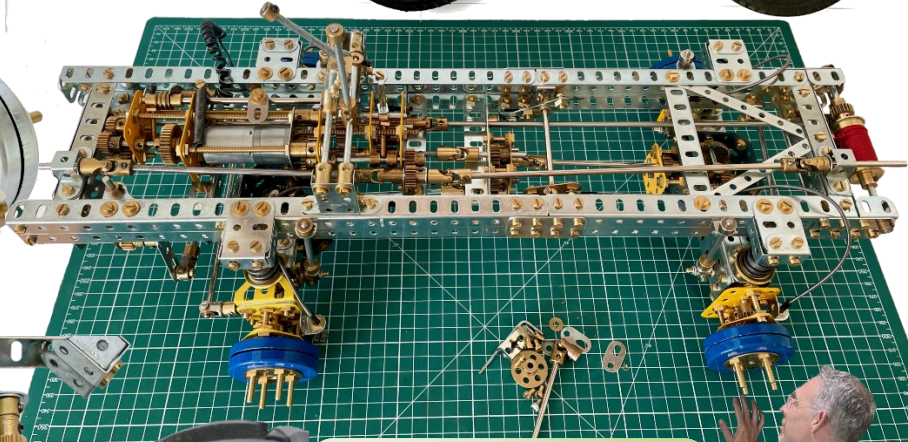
The frame with mounted portal axles. On the left the gearbox by Richard Smith fits underneath the bodywork.
